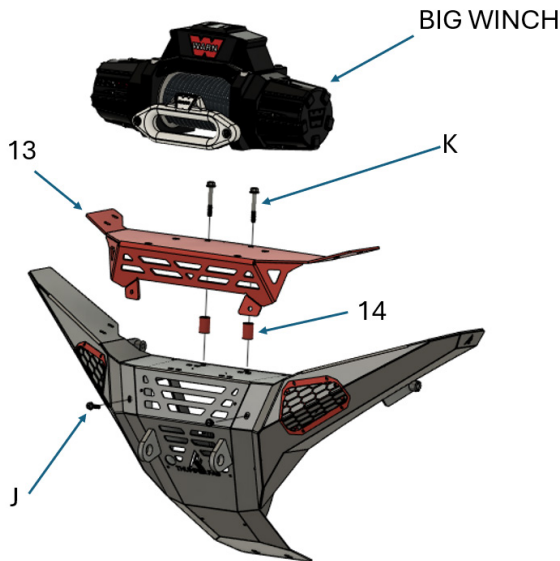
Mount Big Winch Mount to Bumper Body using a 13mm Socket and Wrench and a 15mm Socket and Wrench
